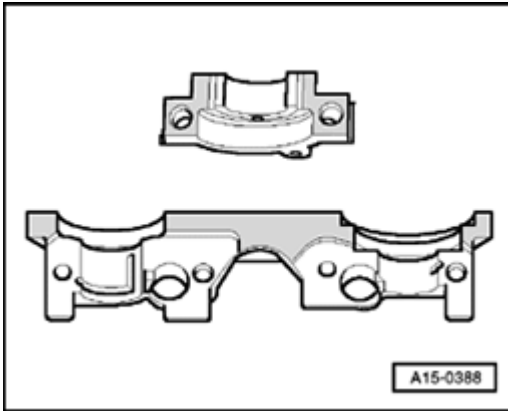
Coating Hatched Surface Of Double Bearing Cap As Well As Outer Bearing Cap Next To Camshaft Adjuster With Sealant
